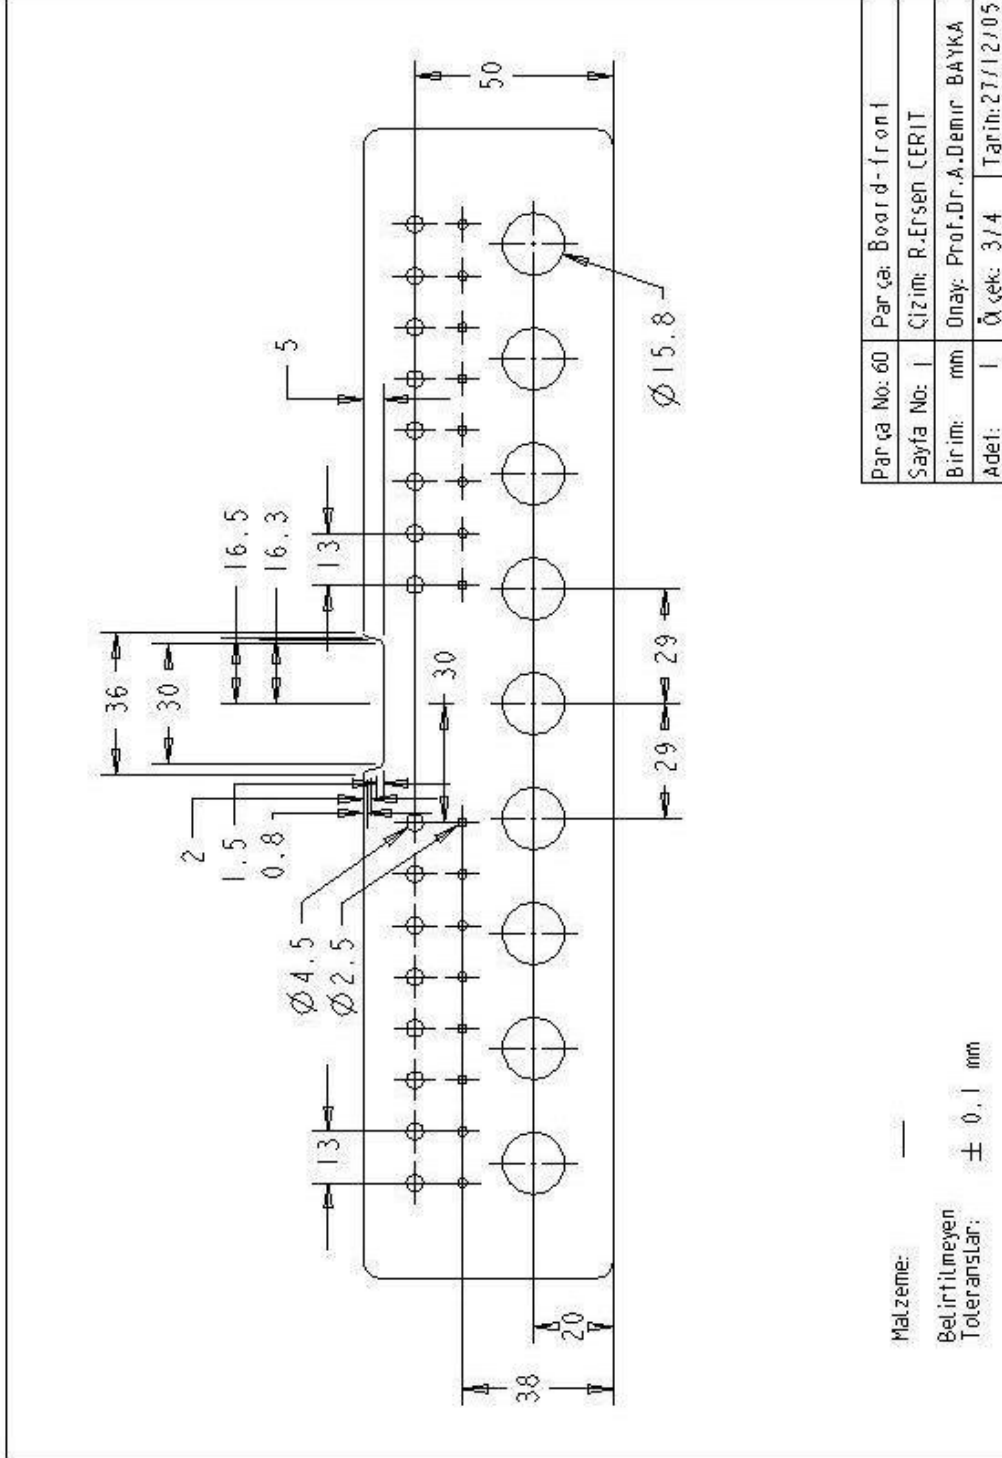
Technical Drawing of Input-Output Box Front Cover.
